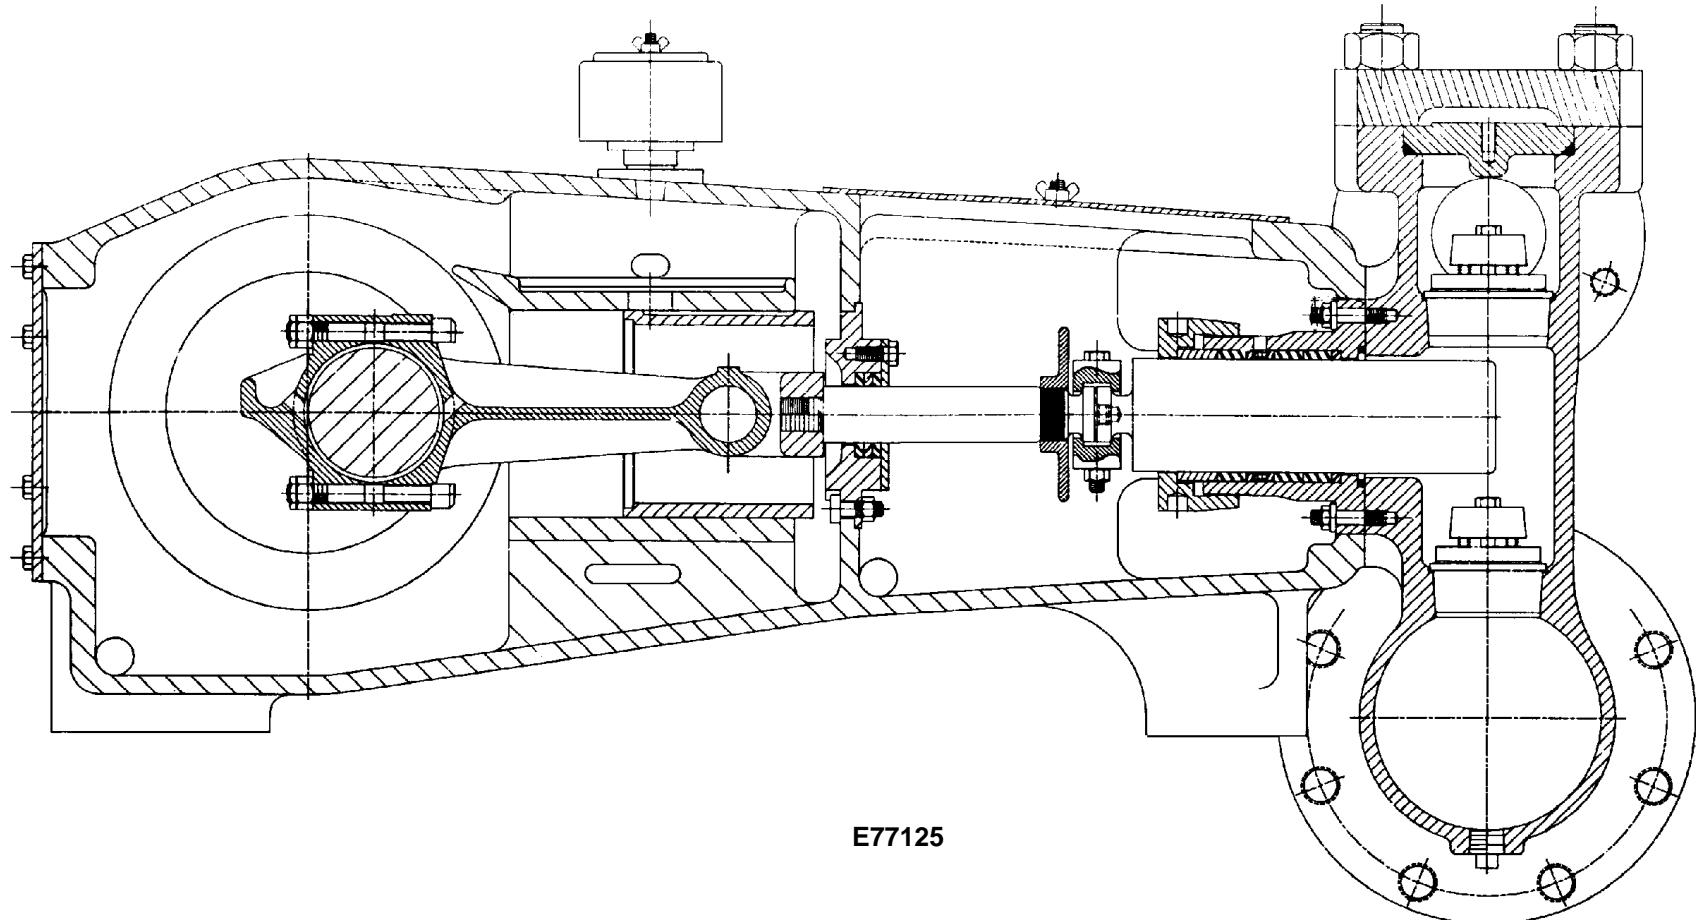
SECTIONAL VIEW OF TRIPLEX AND QUINTUPLEX PLUNGER PUMPS
